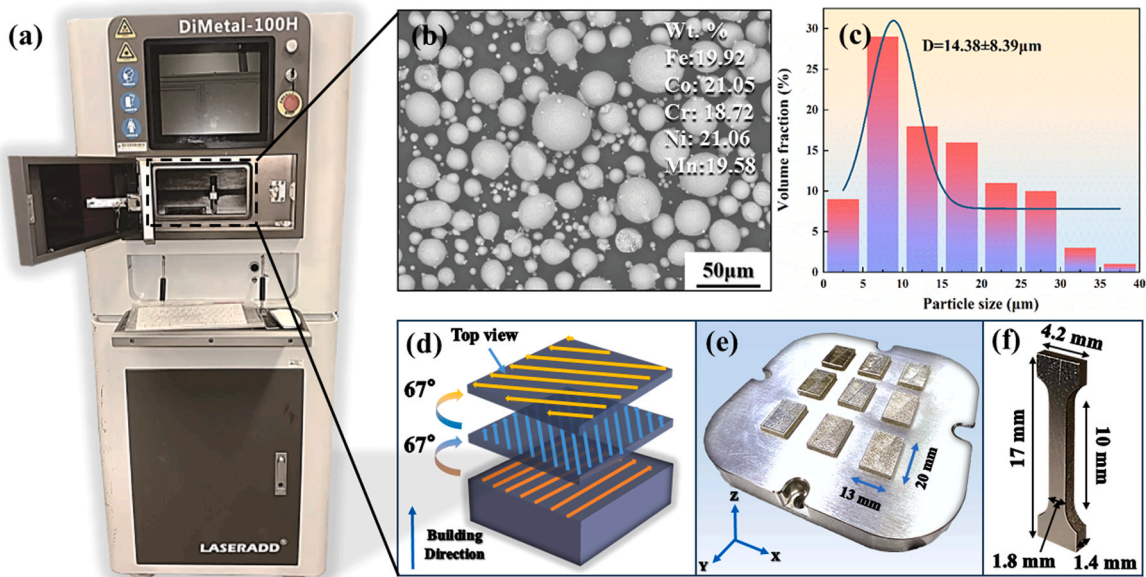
(a) Printing machine of SLM; (b) Powder morphology of FeCoCrNiMn; (c) Particle size distribution; (d) SLM forming principle; (e) Printed samples of FeCoCrNiMn; (f) Sample size dimension for tensile test.
